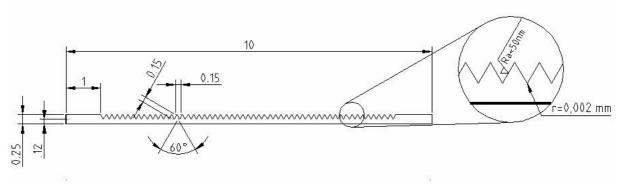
Grooves dimensions resulting from the machining fabrication process (in mm).
